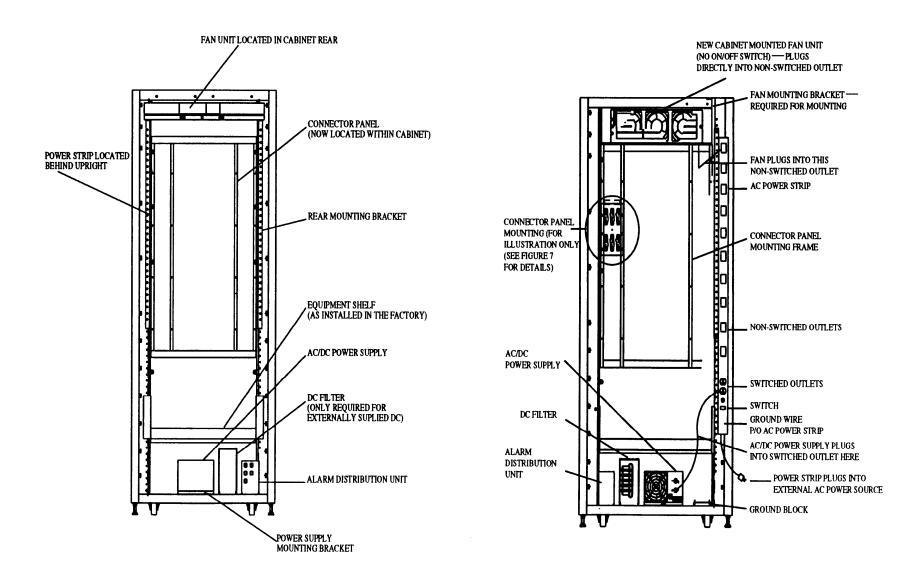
Auxiliary Cabinet (Front View with Door Removed)
